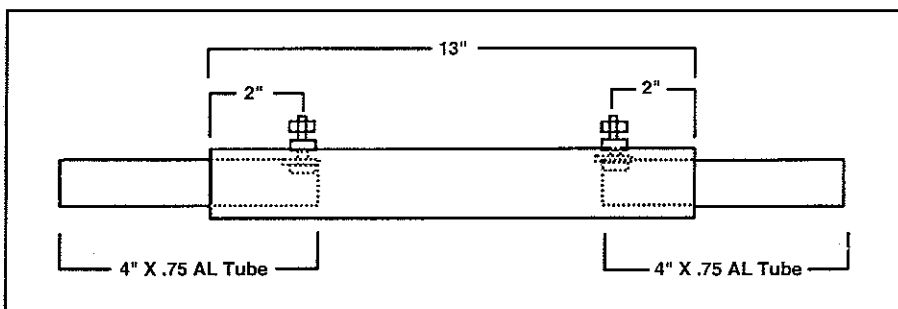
Mechanics of the 160 meter coil assembly. The coil is not shown in this view.
